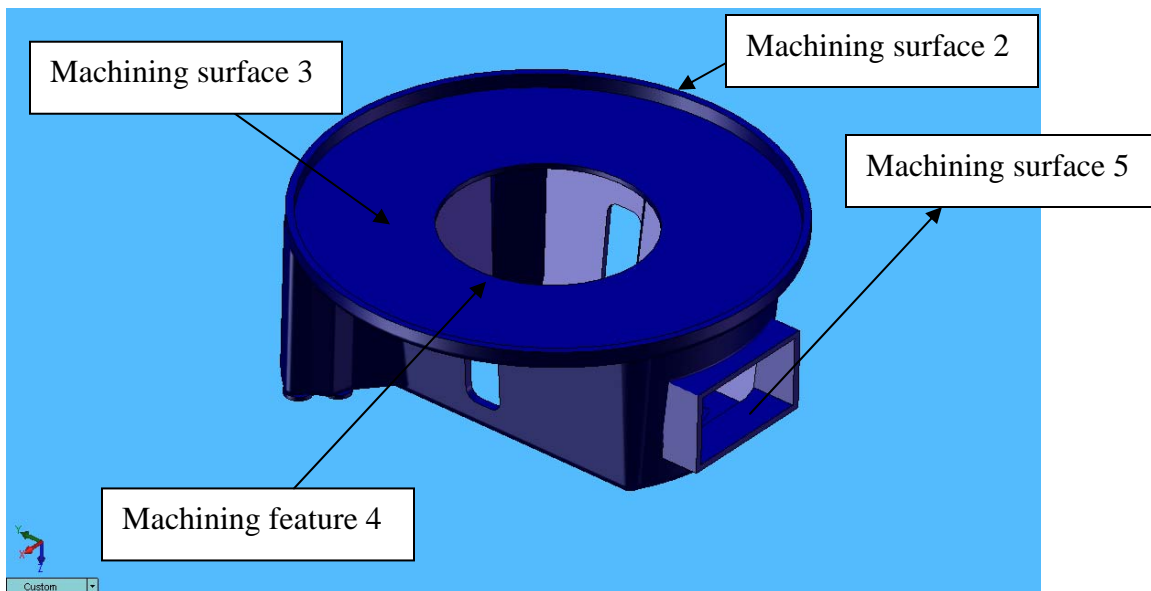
Machining surfaces 2, 3, 4 and 5 on the workpiece
